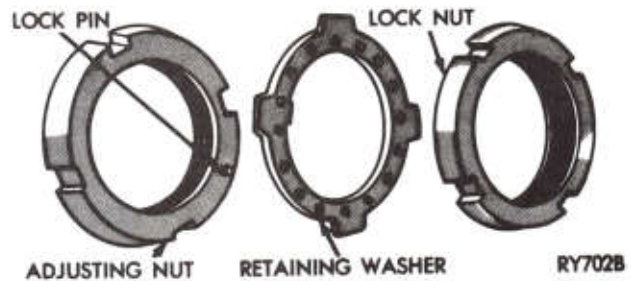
Wheel Bearing Adjusting Nut, Retaining Washer, and Locknut
